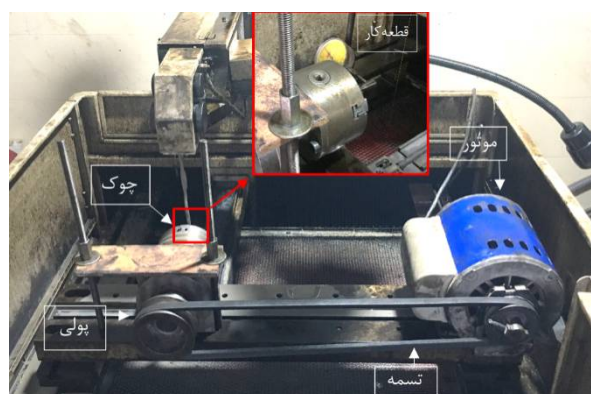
Wire cut device and rotary mechanism added to it for tests
